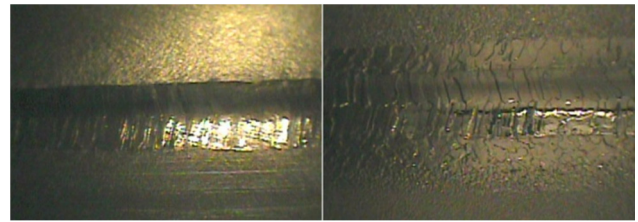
Inner surface condition at the welding region (left: Before BCP and HPR, right: After BCP and HPR).
